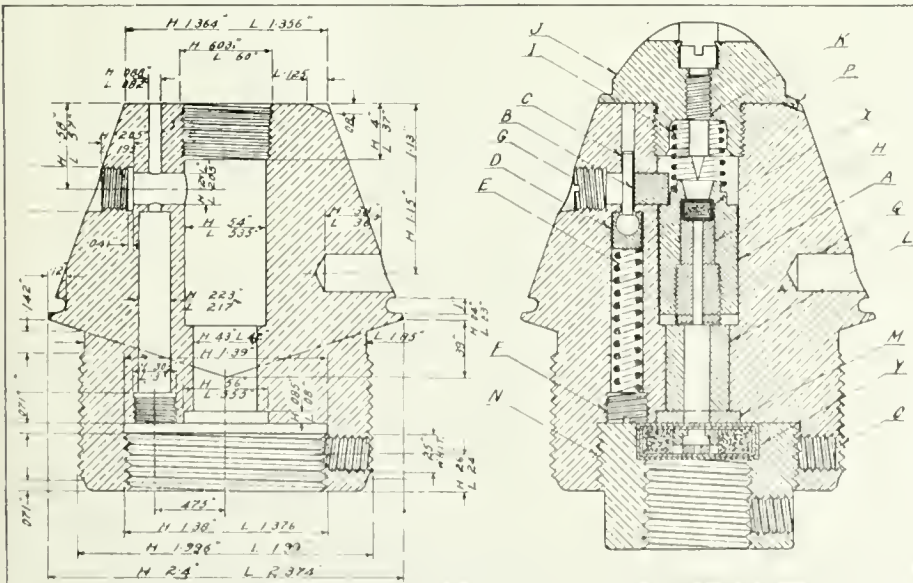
DETAIL OF FUSE BODY AND GENERAL ASSEMBLY.
